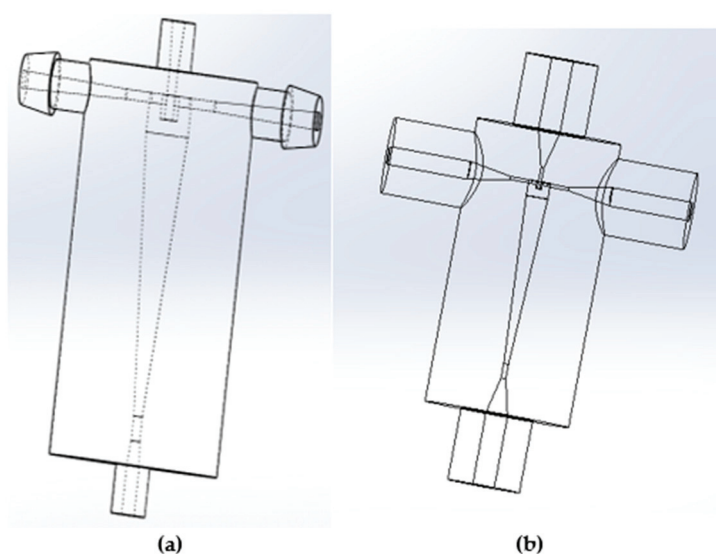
CAD drawings of hydrocyclones in SolidWorks. (a) Design I and (b) design II.
